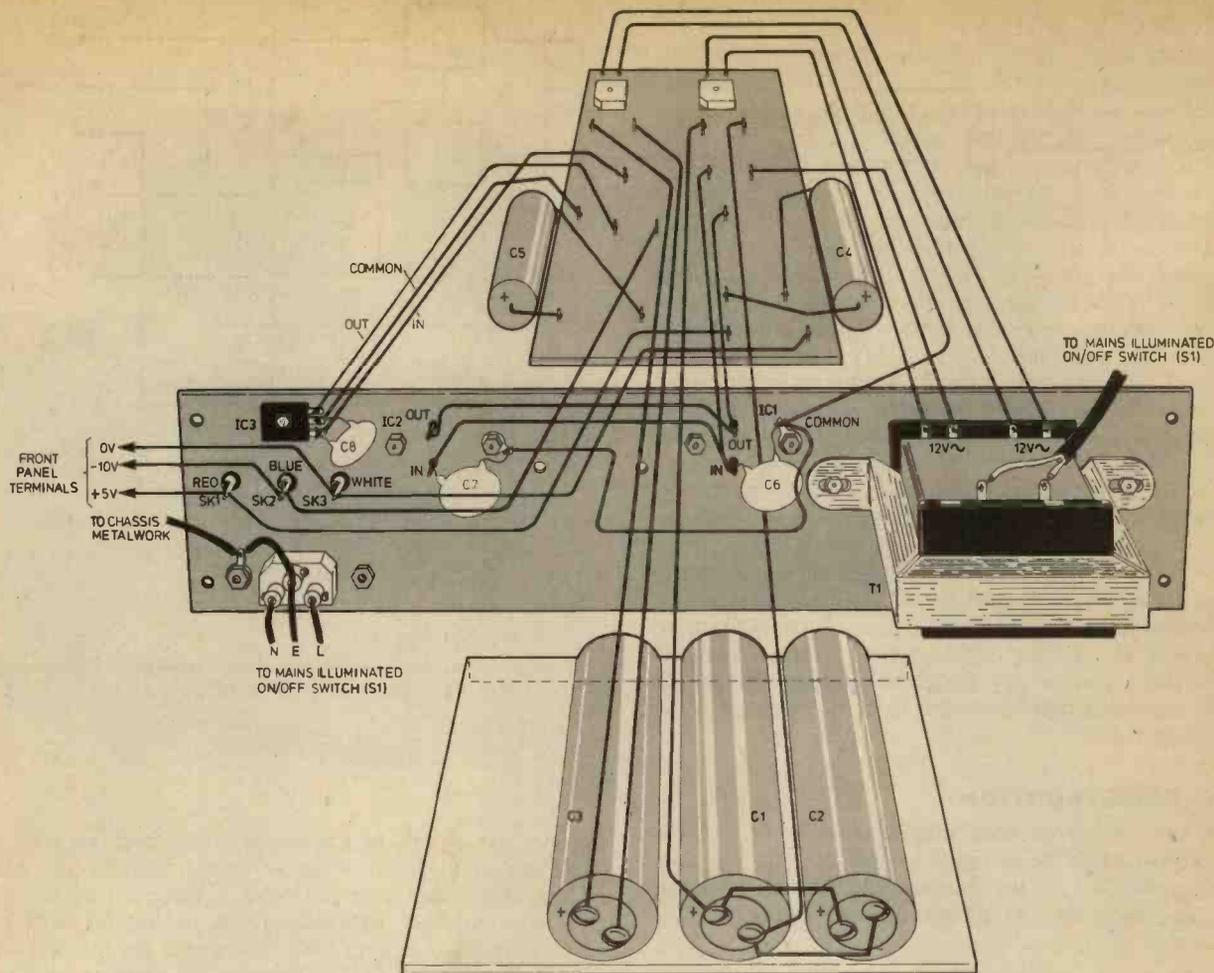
Exploded view and wiring layout of CHAMP power supply. The p.c.b. and the large electrolytic support plate are both mounted on the CHAMP back-plate
